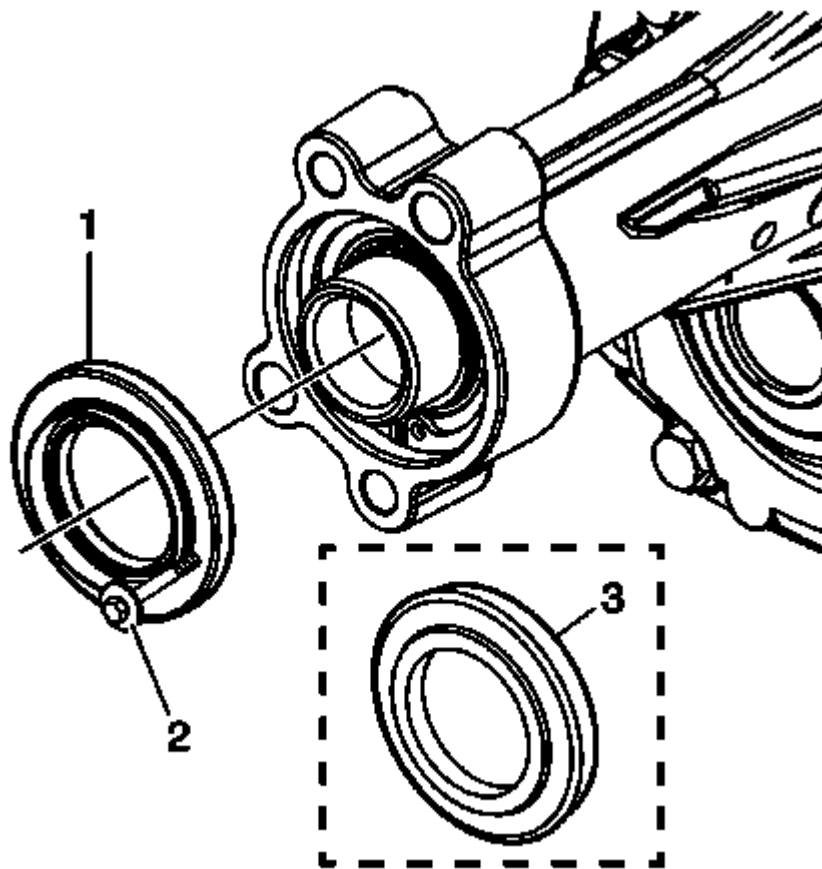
View Of Shaft Dirt Deflector & Grease Seal Assembly
